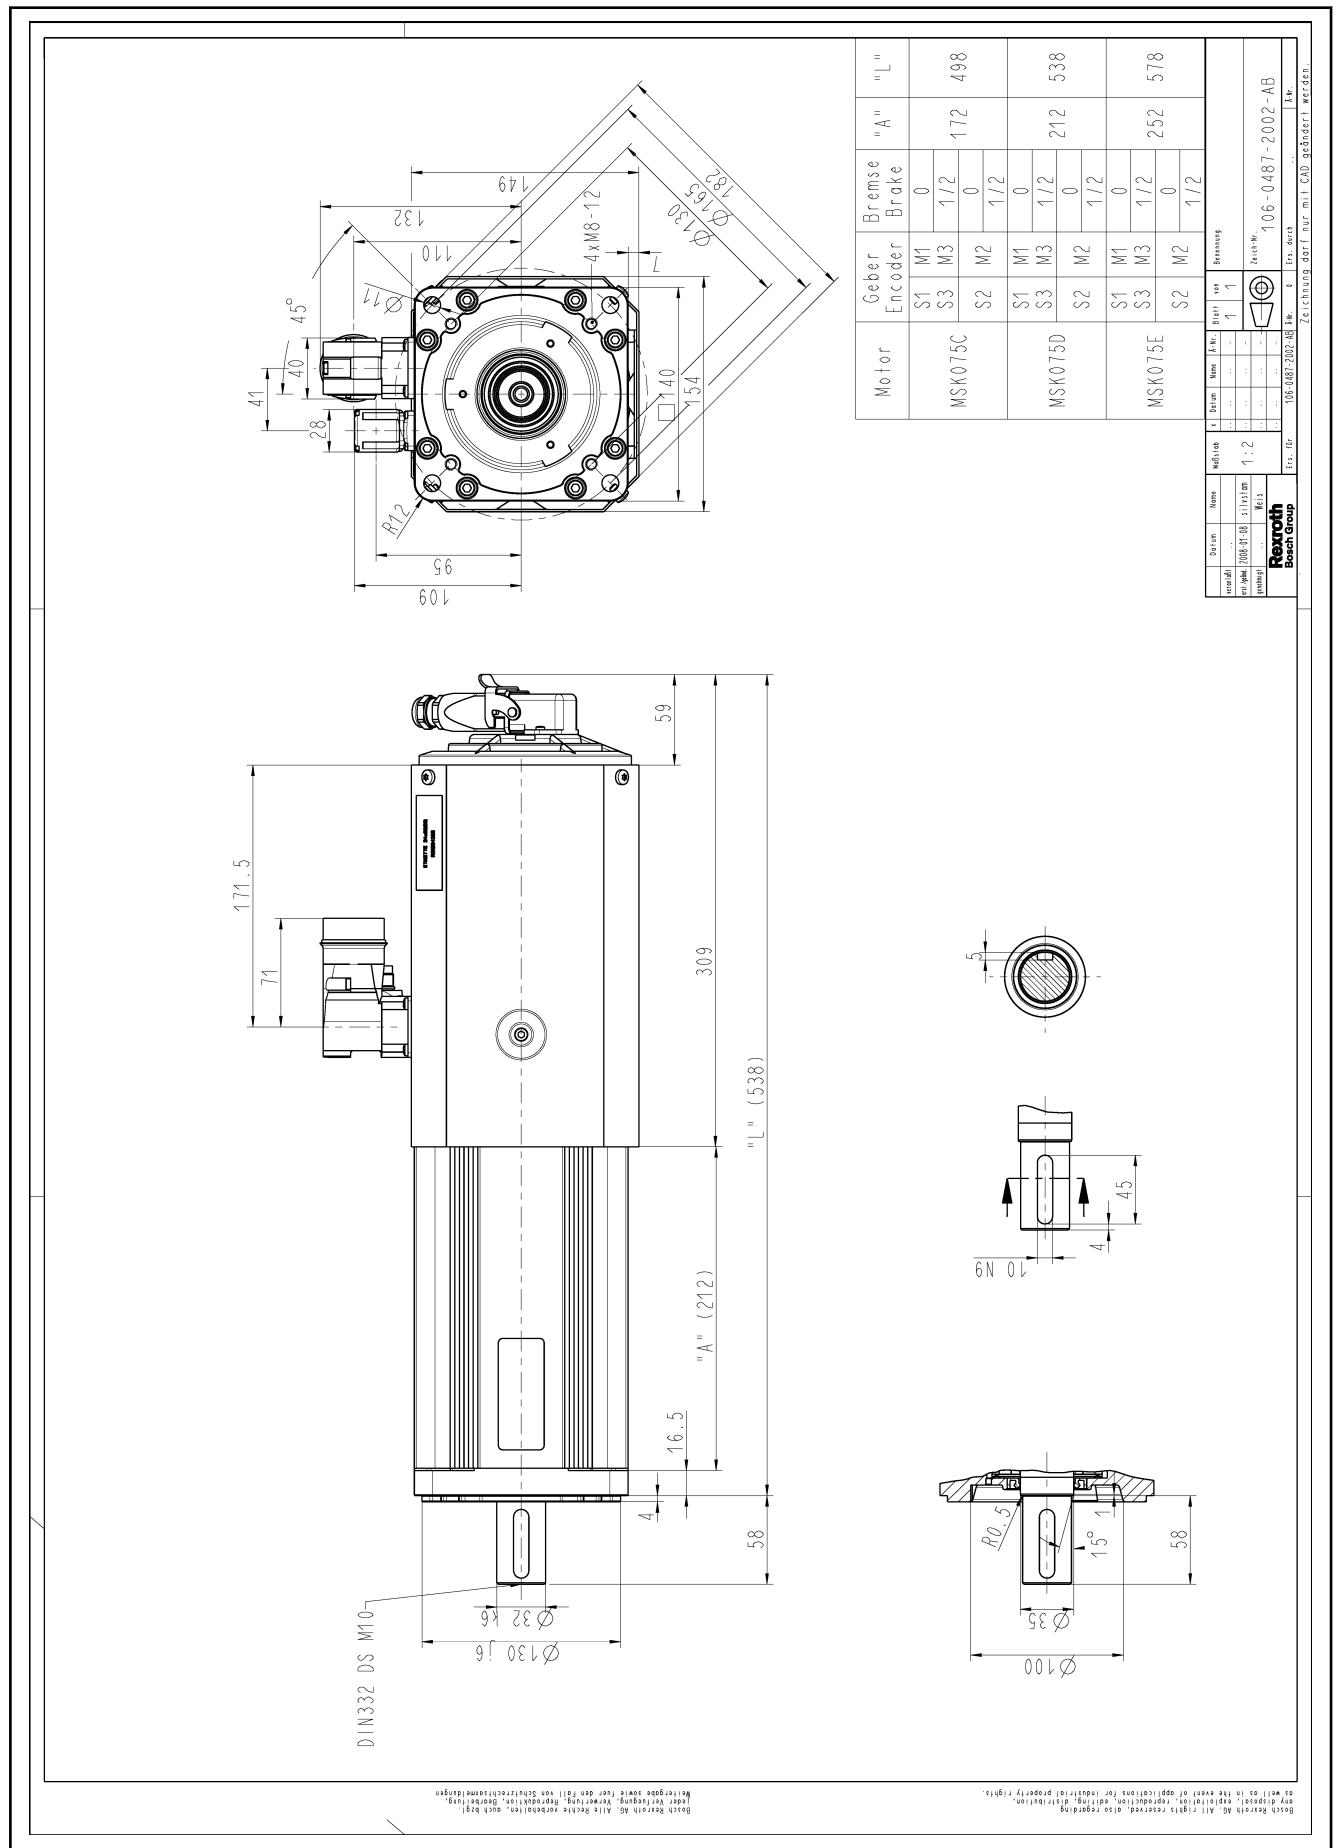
Dimension sheet MSK075 with axial fan unit
